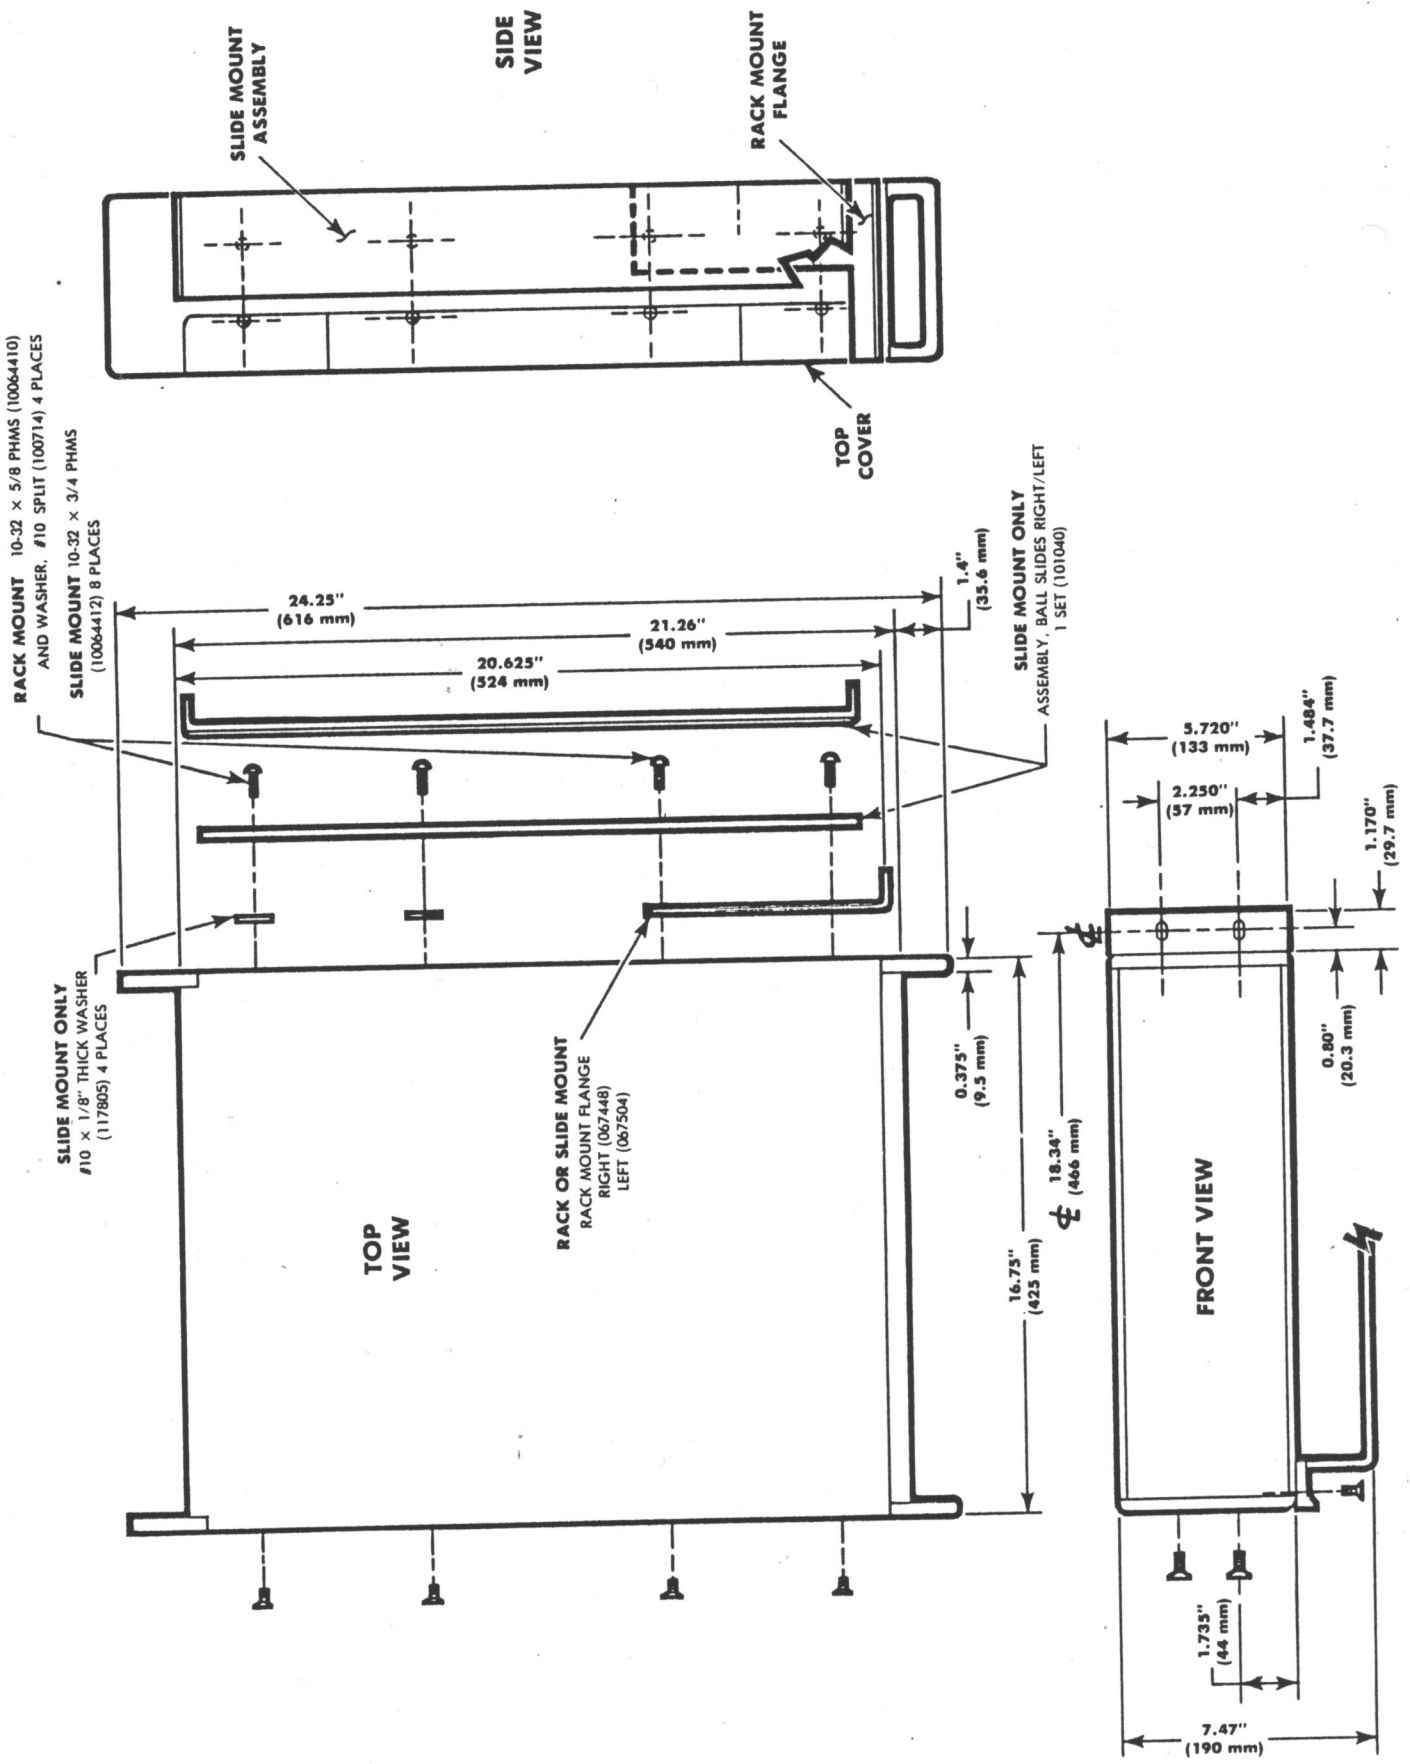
Outline Drawing and Rack/Slide Mounting Details
